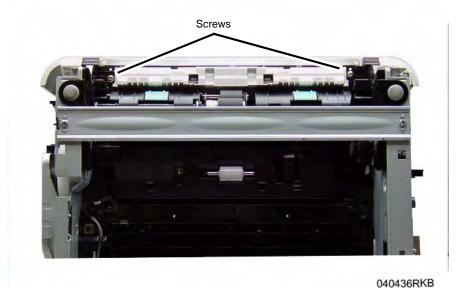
Manual Paper Tray Bottom Screws (Bottom View)
